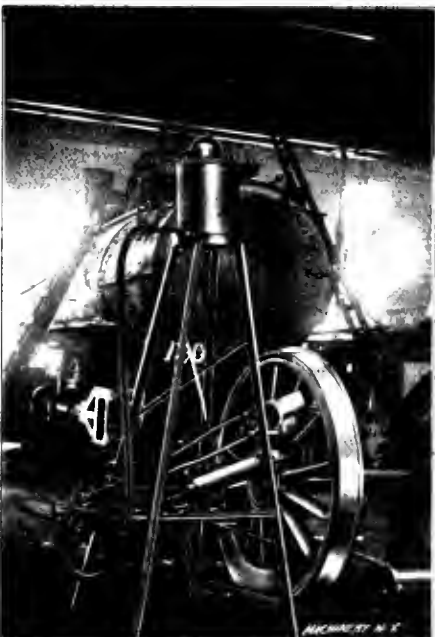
Crude Oil Burner used for Frame Welding
